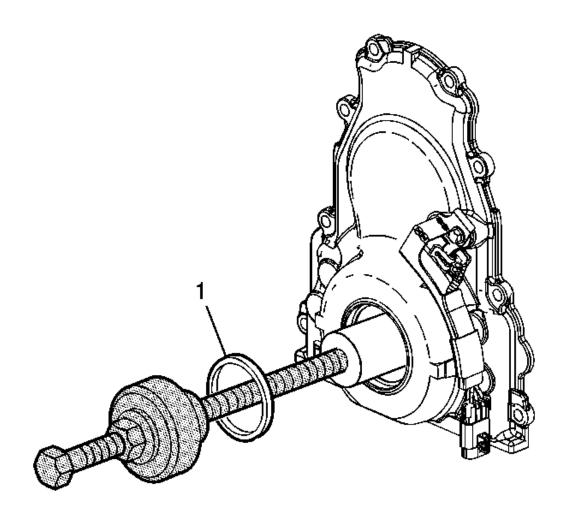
View Of Crankshaft Front Oil Seal Installation Courtesy of GENERAL MOTORS CORP.
